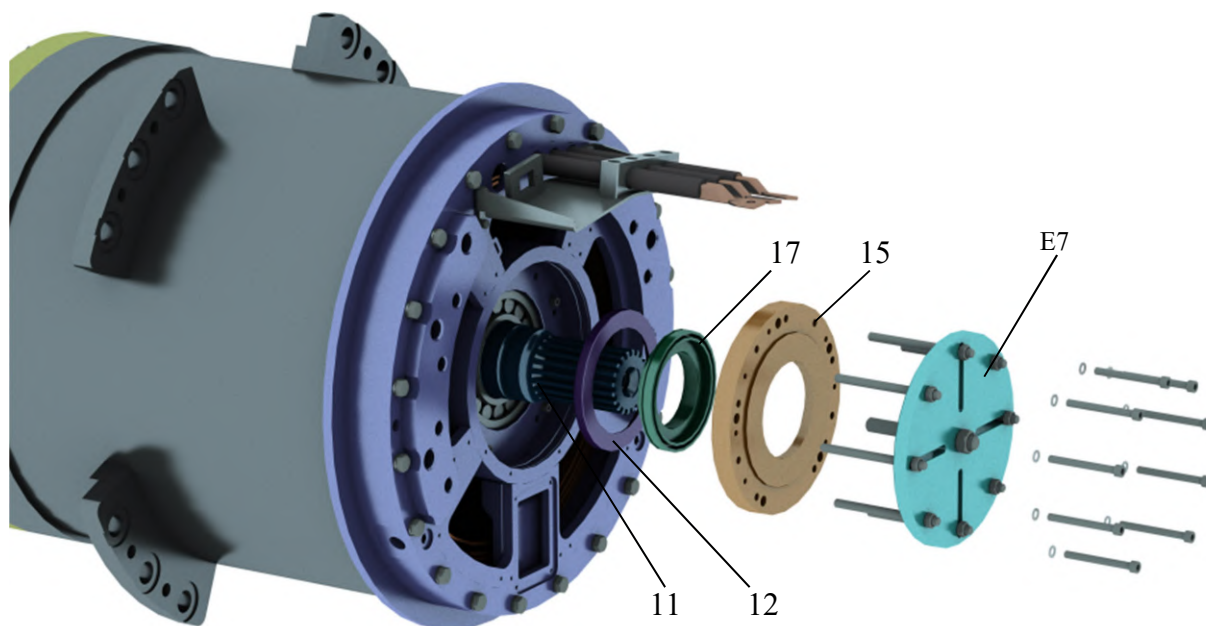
Dismantling of Female Labyrinth Seal, Oil Slinger and Thrust Ring
